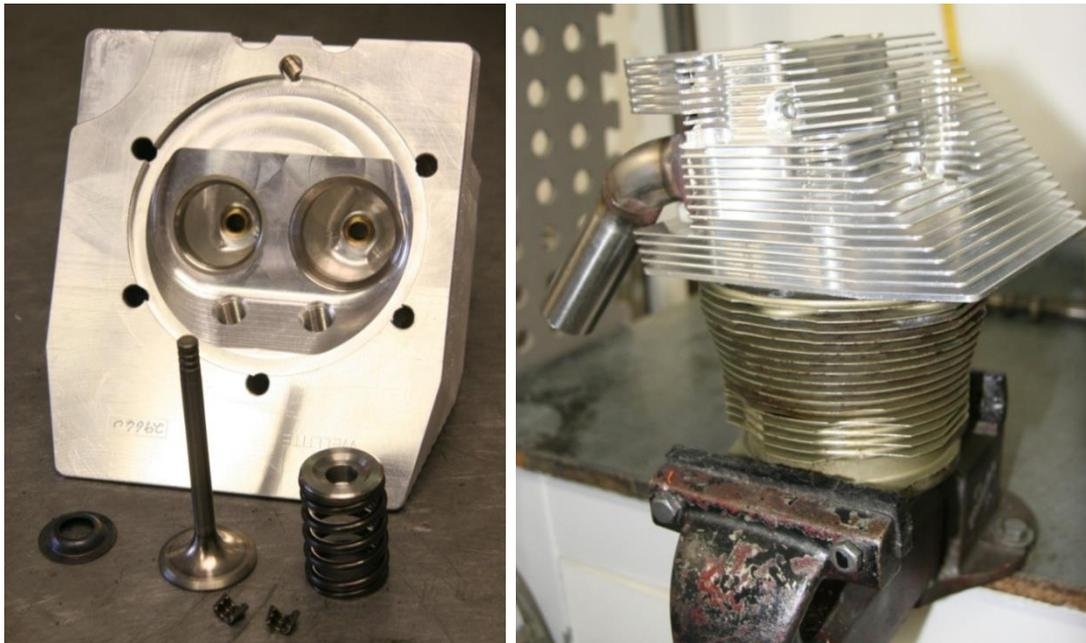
Valves Assembly, Cylinder Head / Cylinder Lapping
